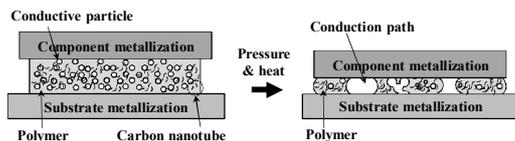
Schematic of interconnection mechanism using CNT-filled Solderable ECA
